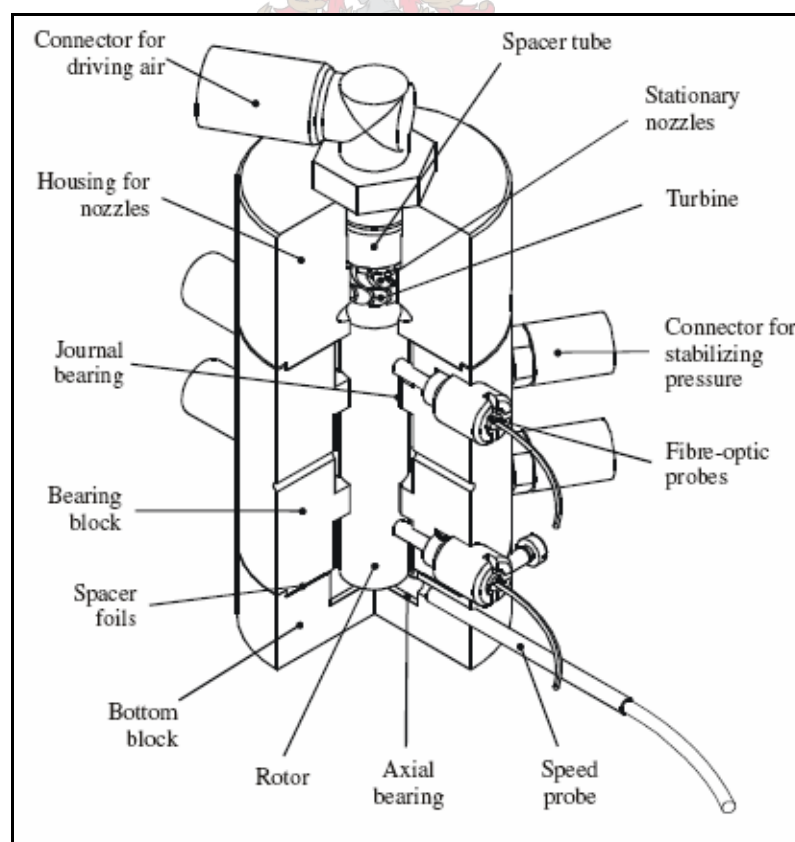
Test set up for the micro-turbine incorporating hybrid gas bearing (Piers, 2004).
